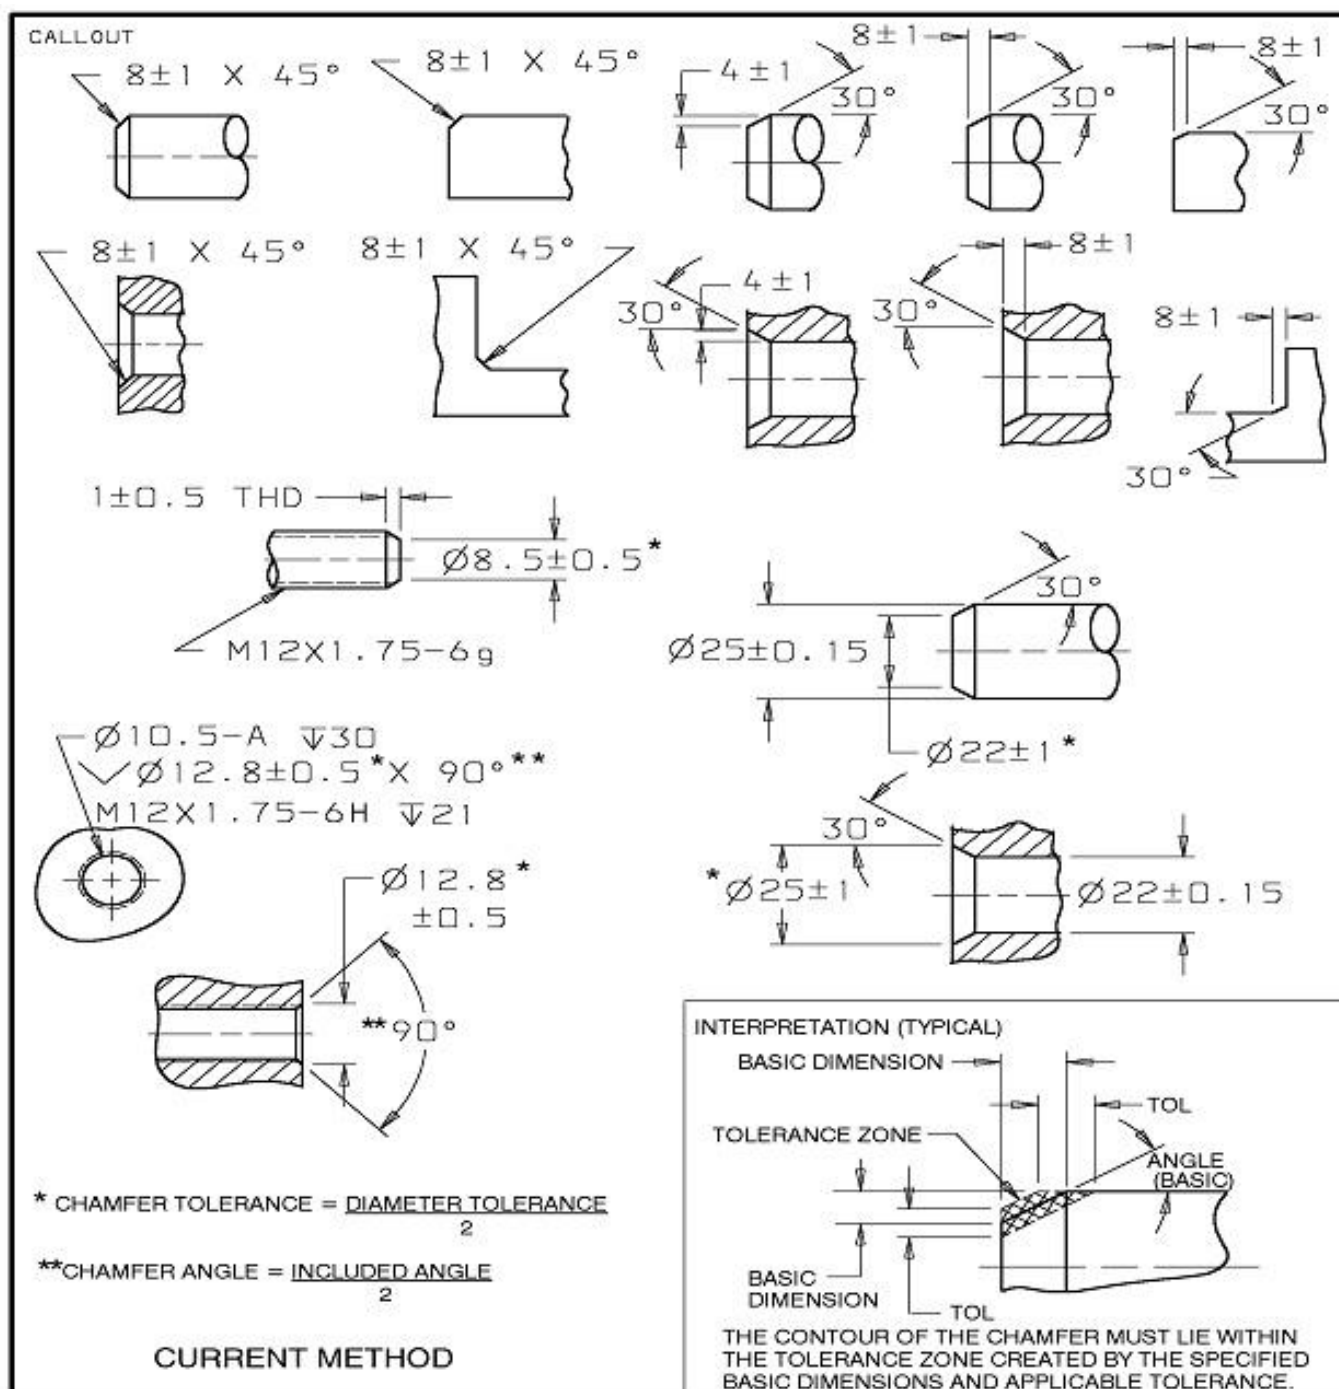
Chamfer Tolerance Zone (Continued on Next Page)
